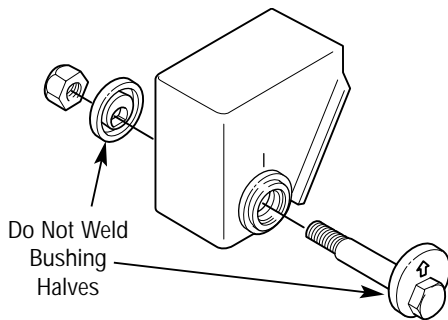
EZ Align Non-Weld Style Assembly
